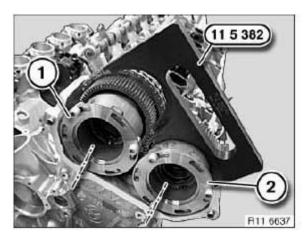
Identifying Inlet VANOS Gear And Exhaust VANOS Gear Courtesy of BMW OF NORTH AMERICA, INC.
